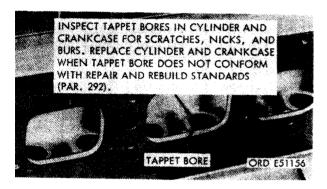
CHECKING TAPPET BORE CLEARANCE.
